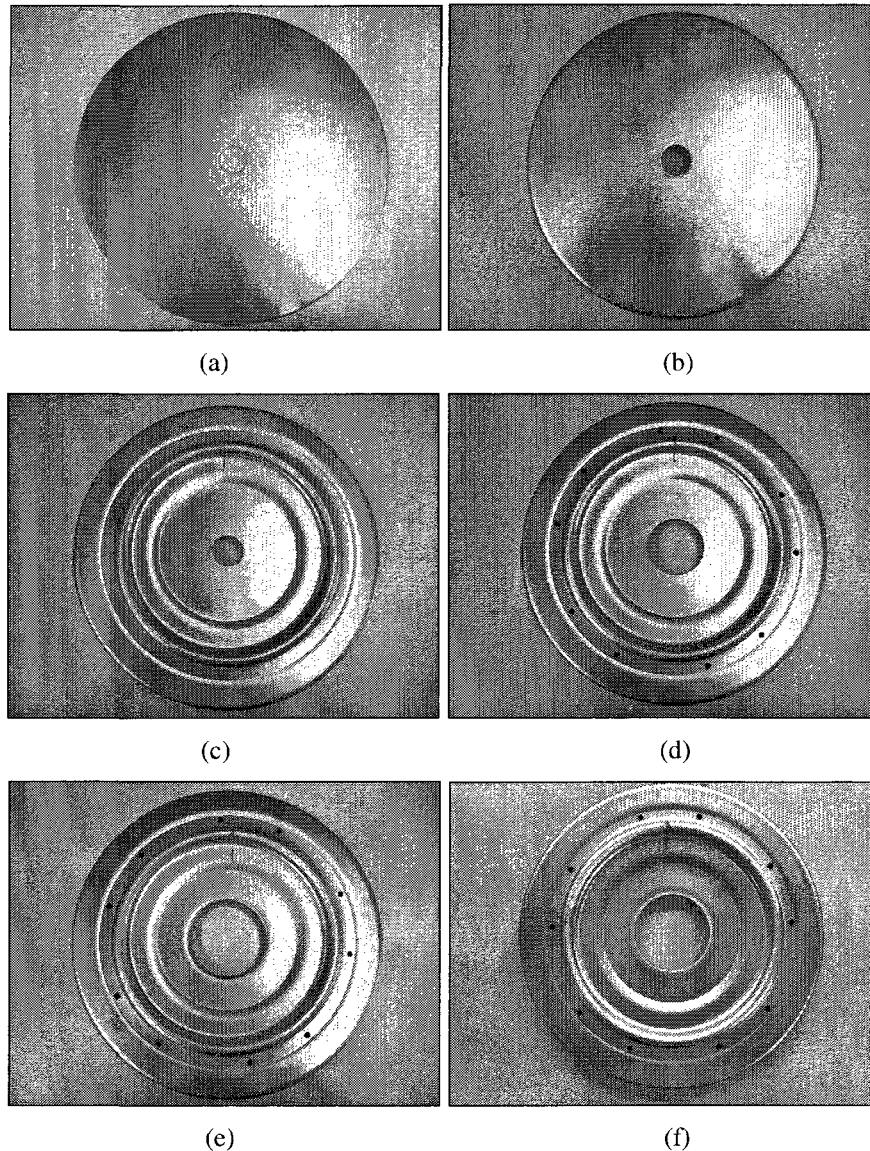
Five stage stamping operation of a torque converter piston. (a) Piston blank; (b) piston at stamping stage 1; (c) at stamping stage 2; (d) at stamping stage 3; (e) at stamping stage 4; and (f) at stamping stage 5.
